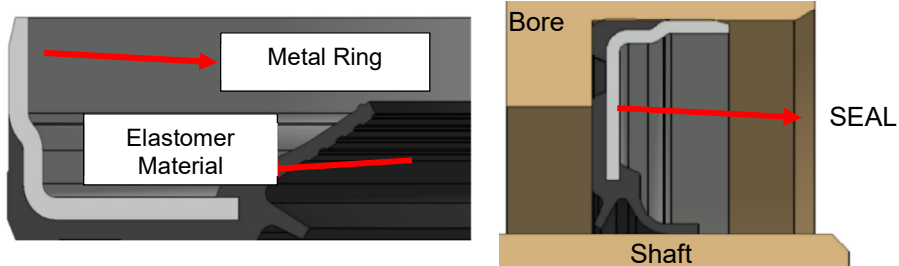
E-Mobility Seal Section (a) Assembled Section (b)
